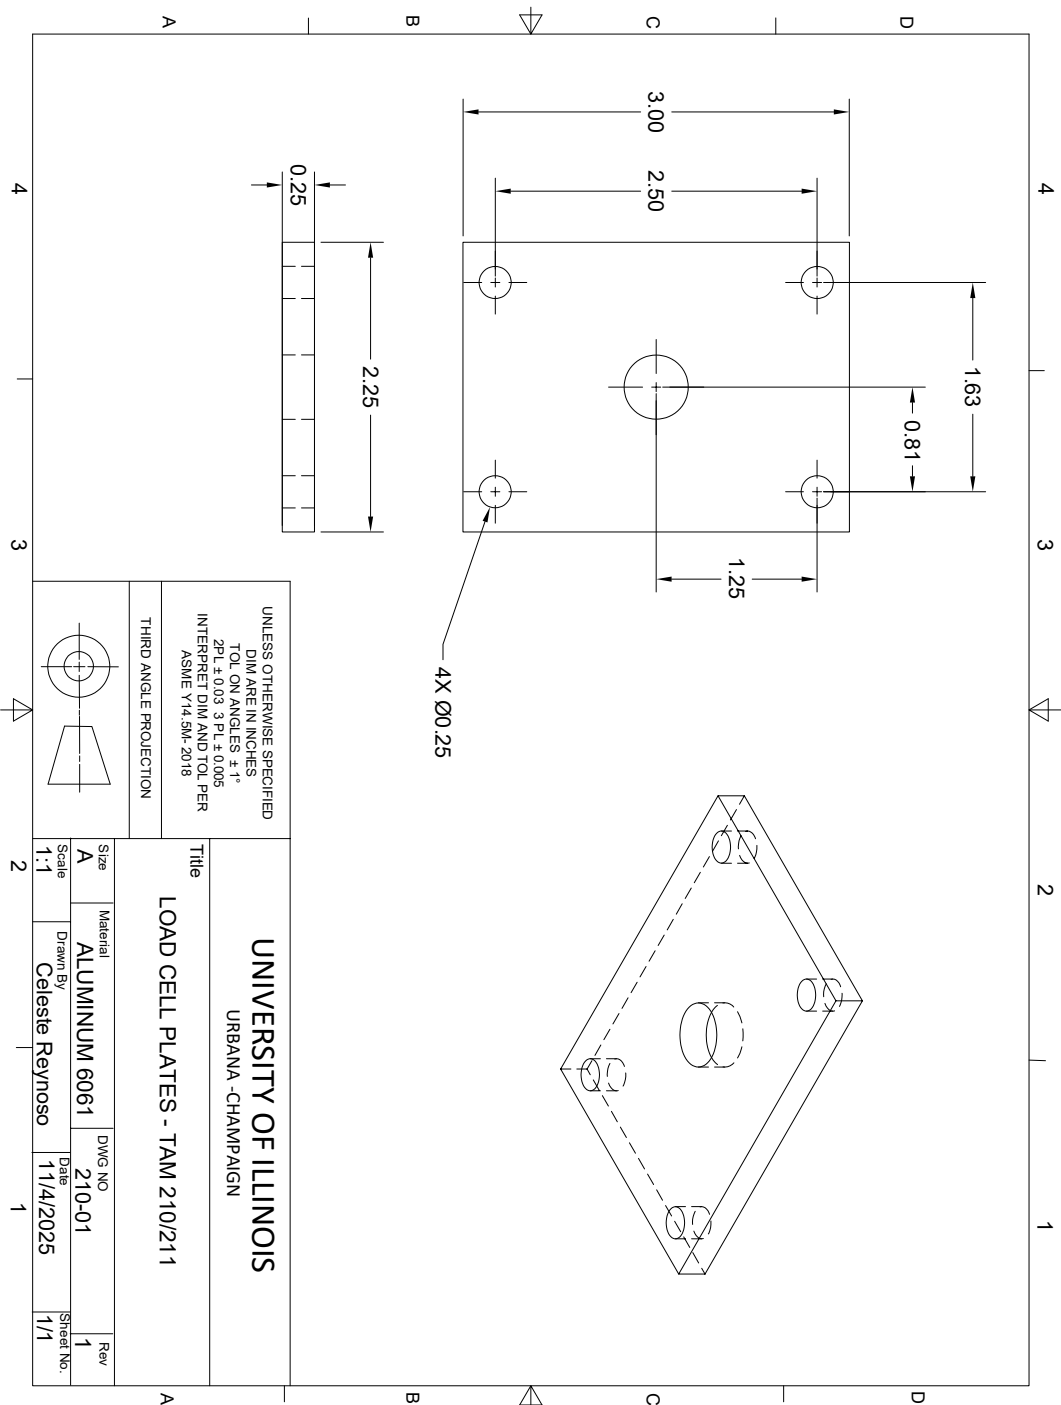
Statics Demonstration: Load Cell Plate Drawing
